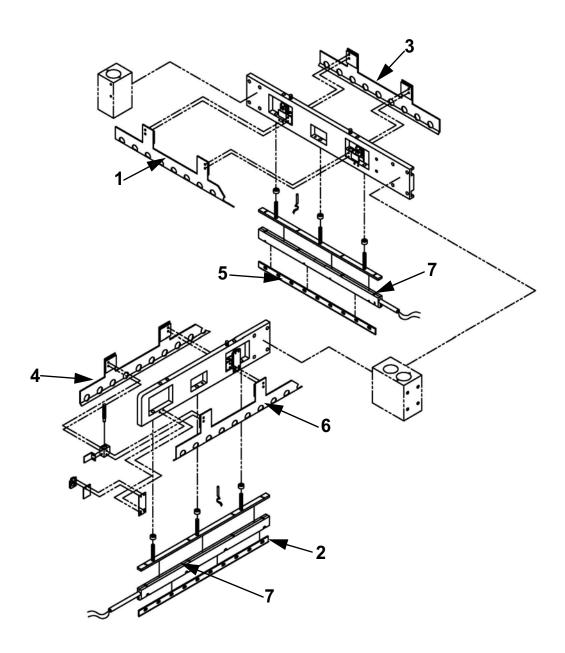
Seal Bar Kit - Mushroom Radius Corner L-26
